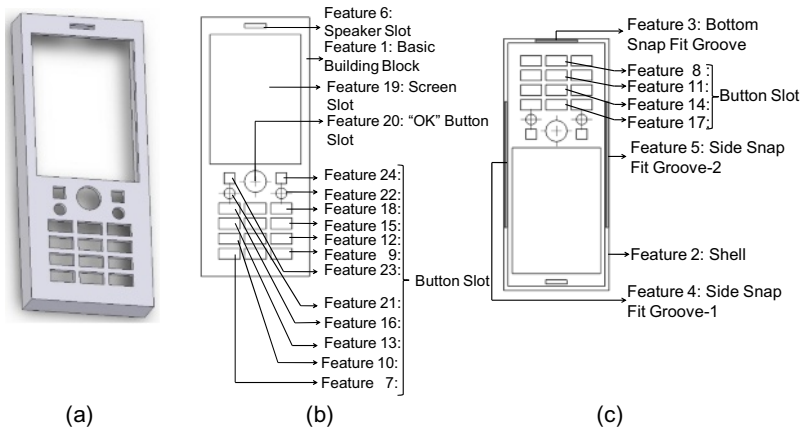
Cell phone casing model 1: (a) isometric view, (b) top view, and (c) bottom view
